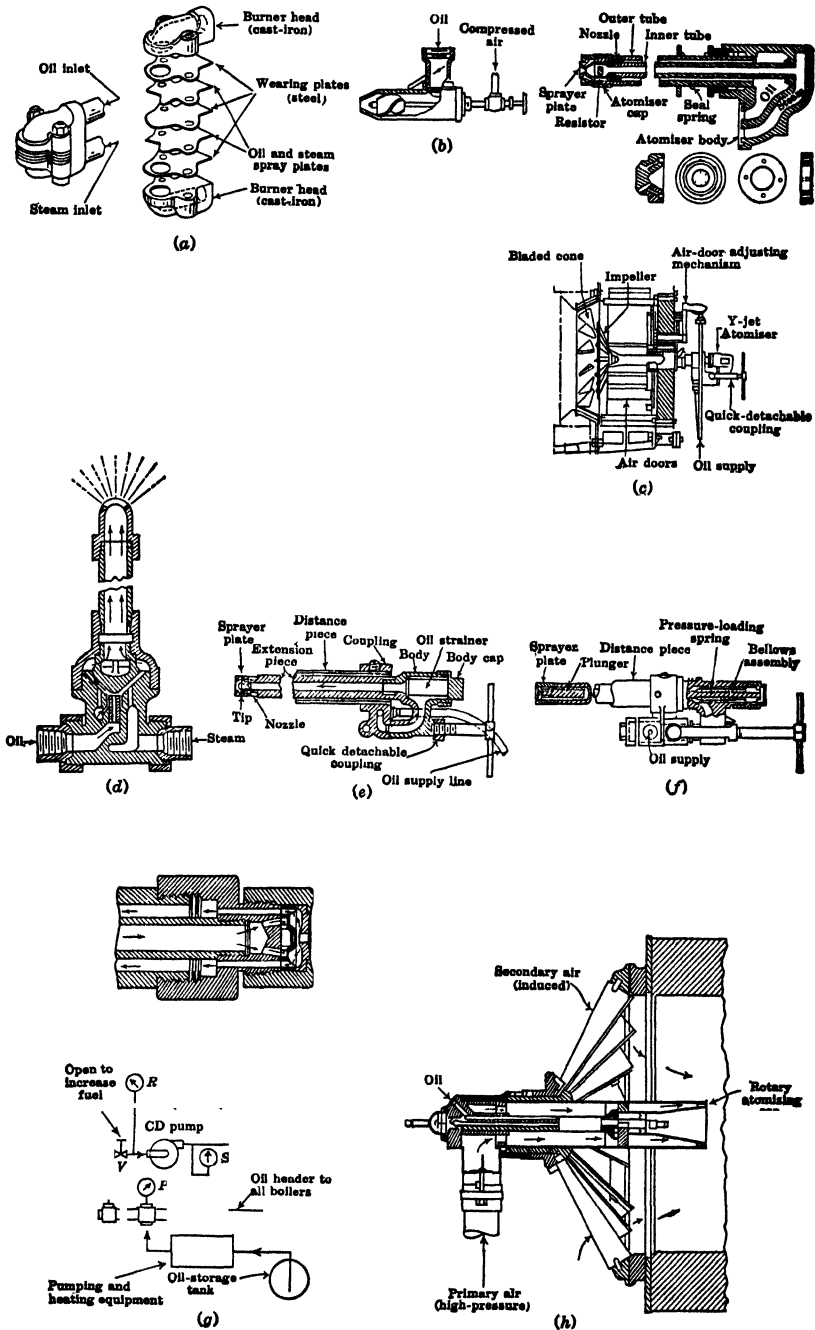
(a) and (b) External mixing burners. (c) and (d) Premixing steam-atomising burners. (e) Spray nozzle burner. (f) Pressure-plunger controlled spray nozzle burner. (g) Recirculating burner. (h) Rotary burner.
